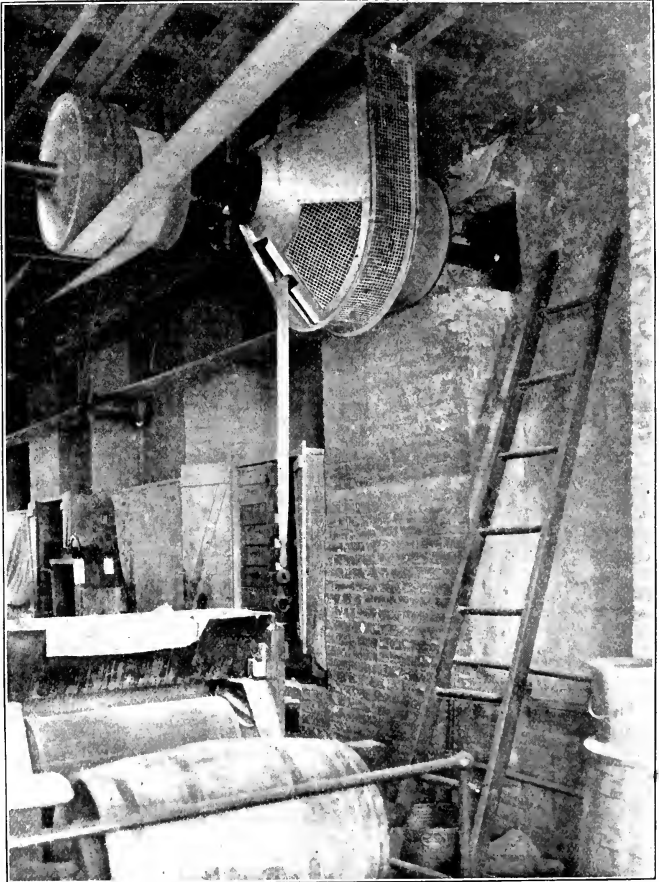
Illustration No. 7. Clutch on main line shafting with toggles enclosed to ceiling.
